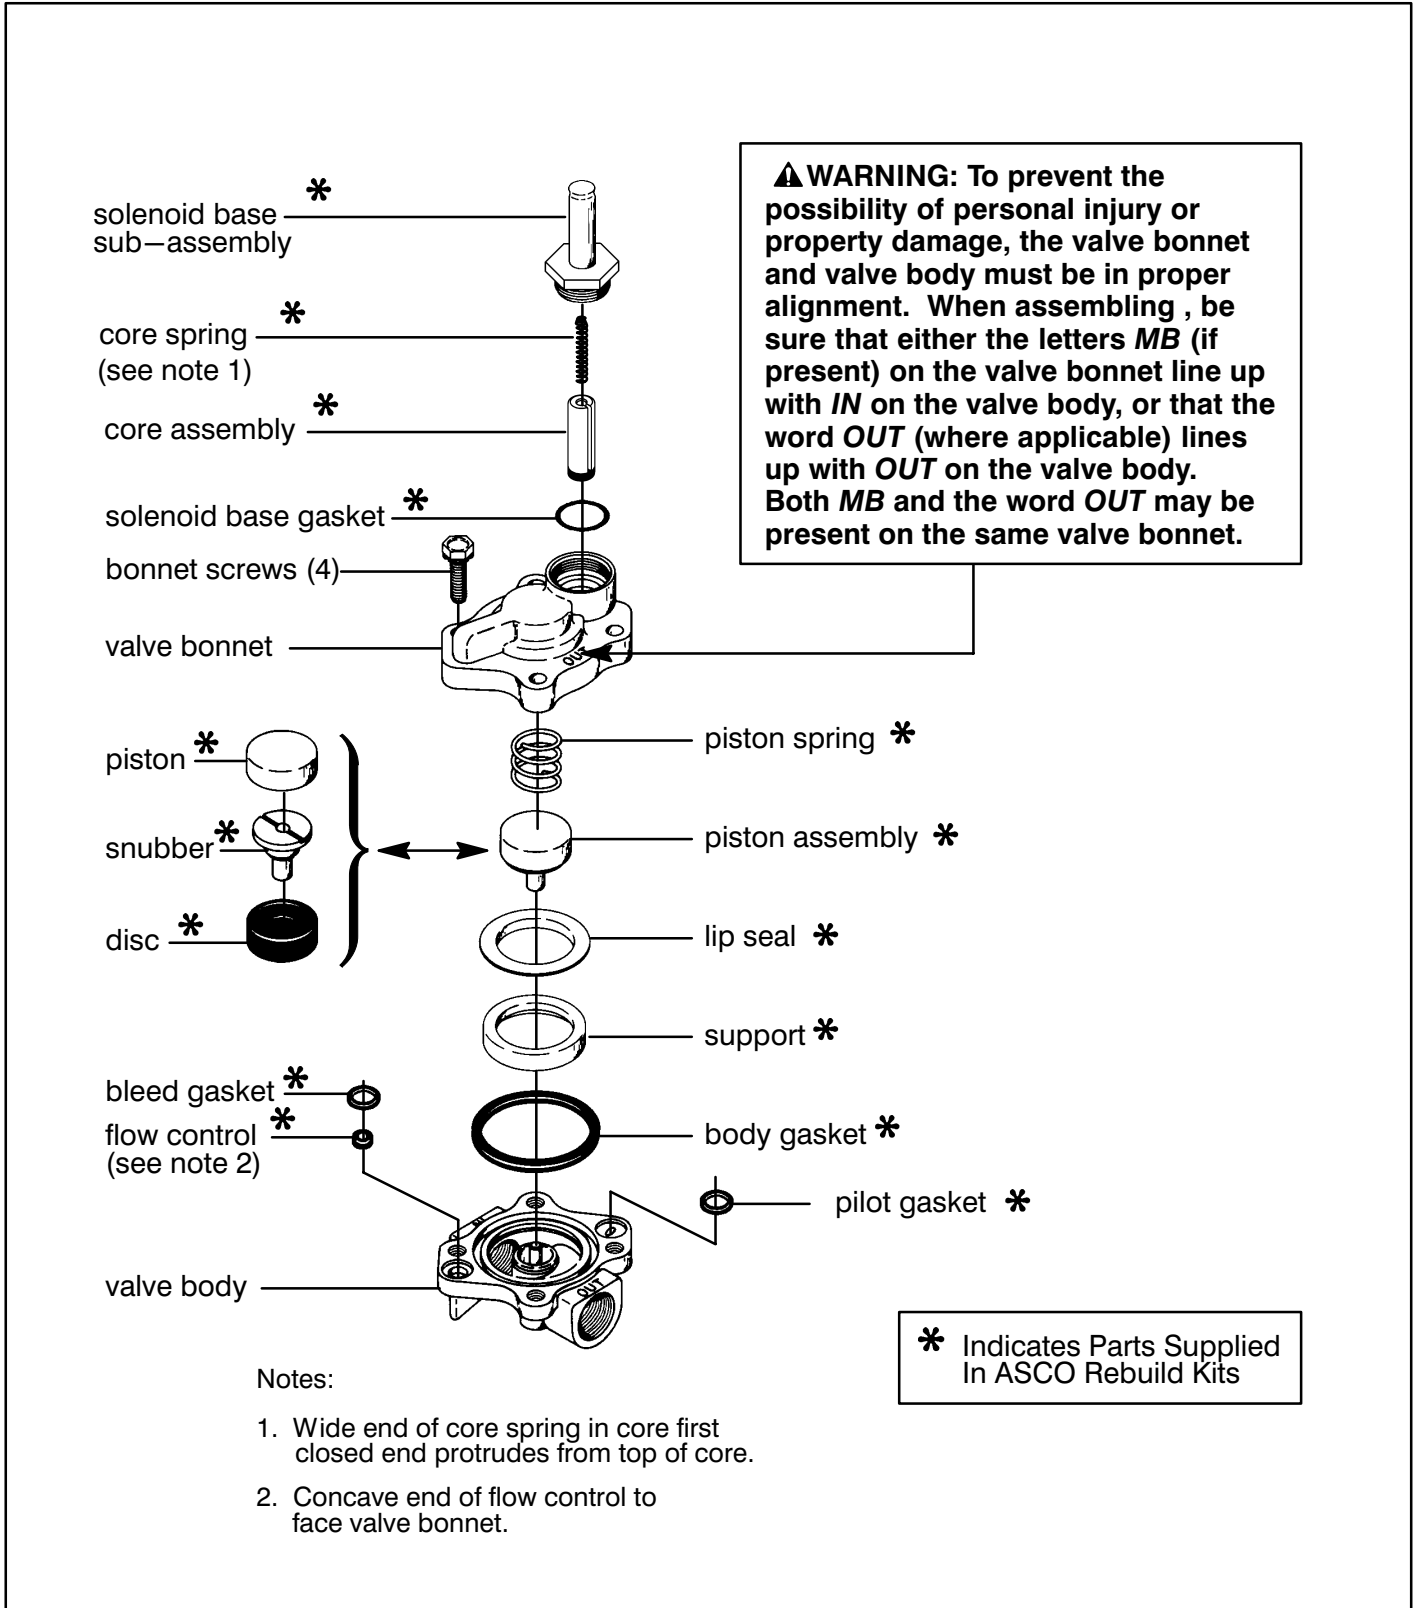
Series 8221 valve without solenoid, AC construction shown.
